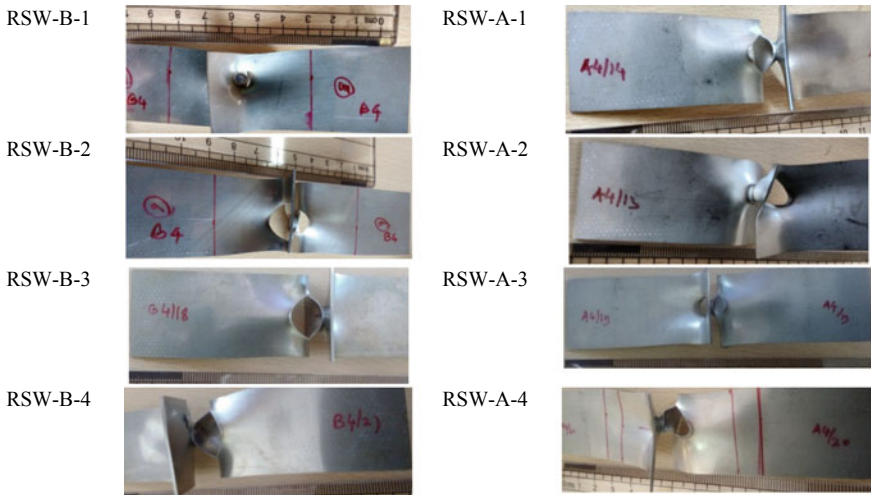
Photographs of resistance single-spot welded samples after tensile shear testing
